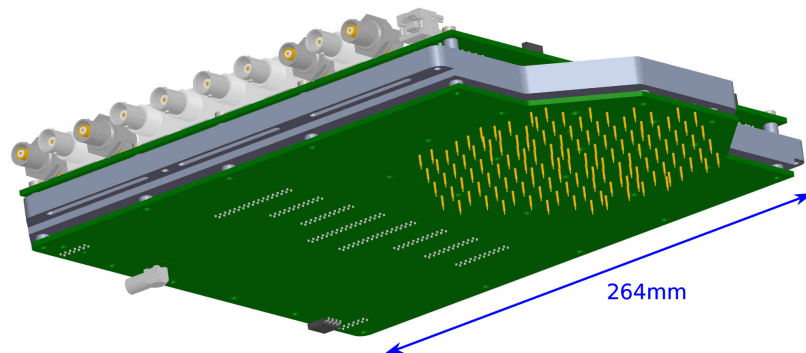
CAD drawing of the probe card for a 6 inch 135 cell sensor with the plug-in switch card on the top.
